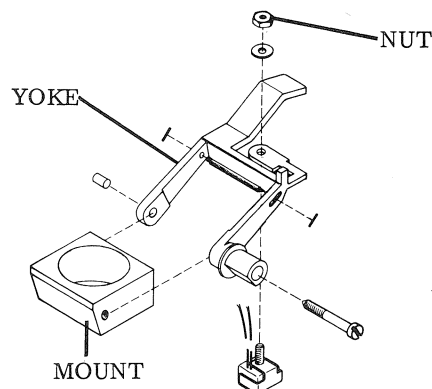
ERASE HEAD & YOKE ASSEMBLY
